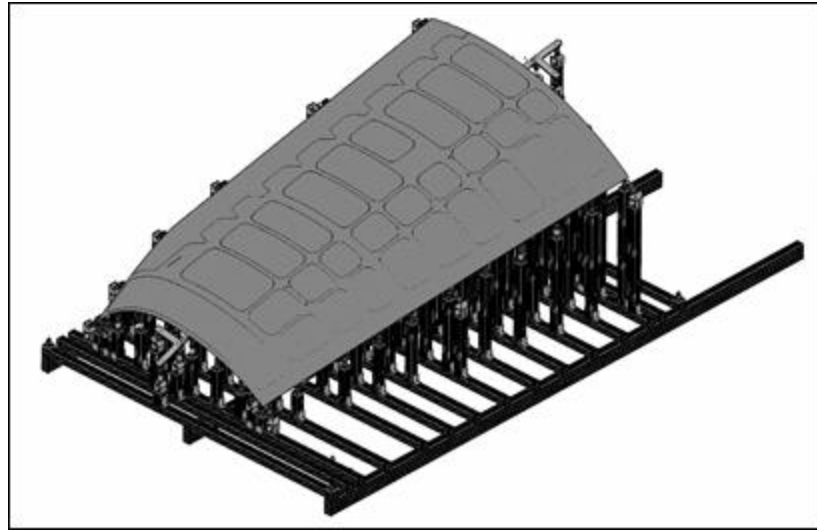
A complex inspection fixture set-up for a large aerospace panel.
